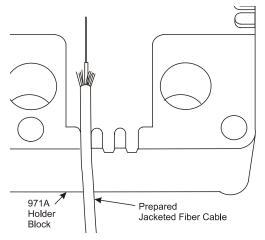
971A Holder Block with Jacketed Fiber Cable
